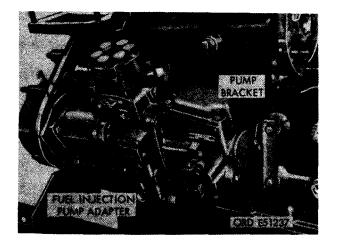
SECURING FUEL INJECTION PUMP ASSEMBLY TO ADAPTER AND INSTALLING PUMP BRACKET (LATE MODEL ENGINES).
